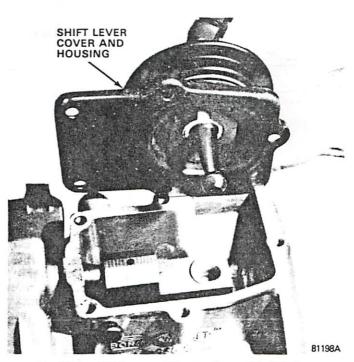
B-1 Shift Lever and Housing Removal/Installation-Models T4 and T5
